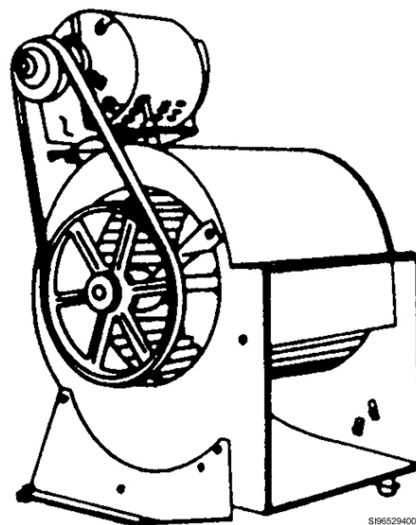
Belt driven blower assembly with motor mounted on top.
